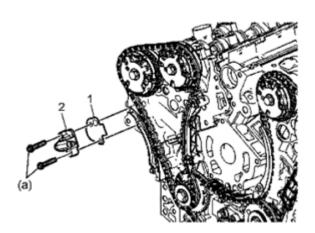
Identifying Timing Chain Tensioner Adjuster No. 1 Bolt Courtesy of SUZUKI OF AMERICA CORP.
